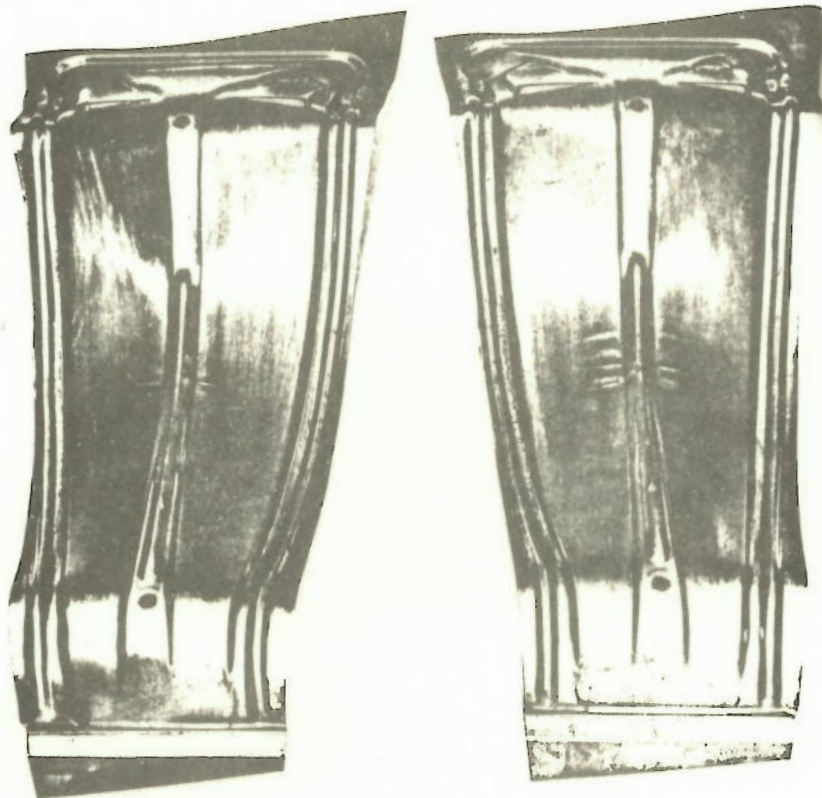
GENERAL VIEW OF PRESSINGS;
